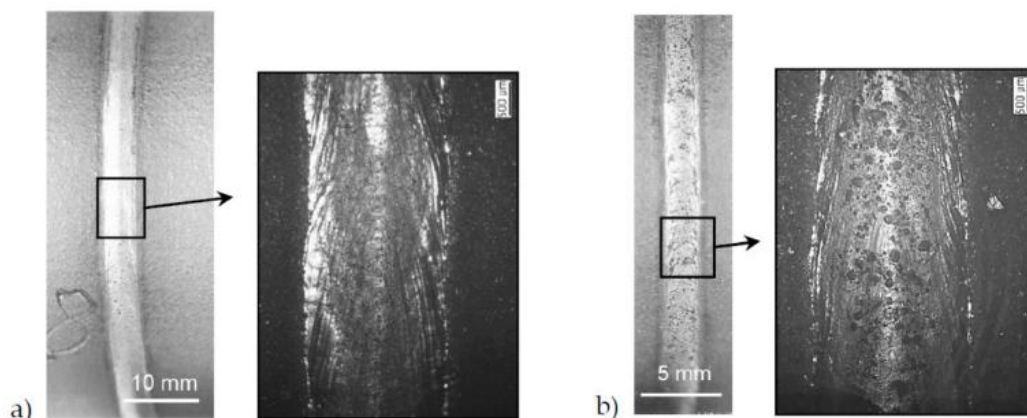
Appearance of weld seam, a) machine cut edge, b) as-built edge. (Jokisch et al. 2019, p. 6).
